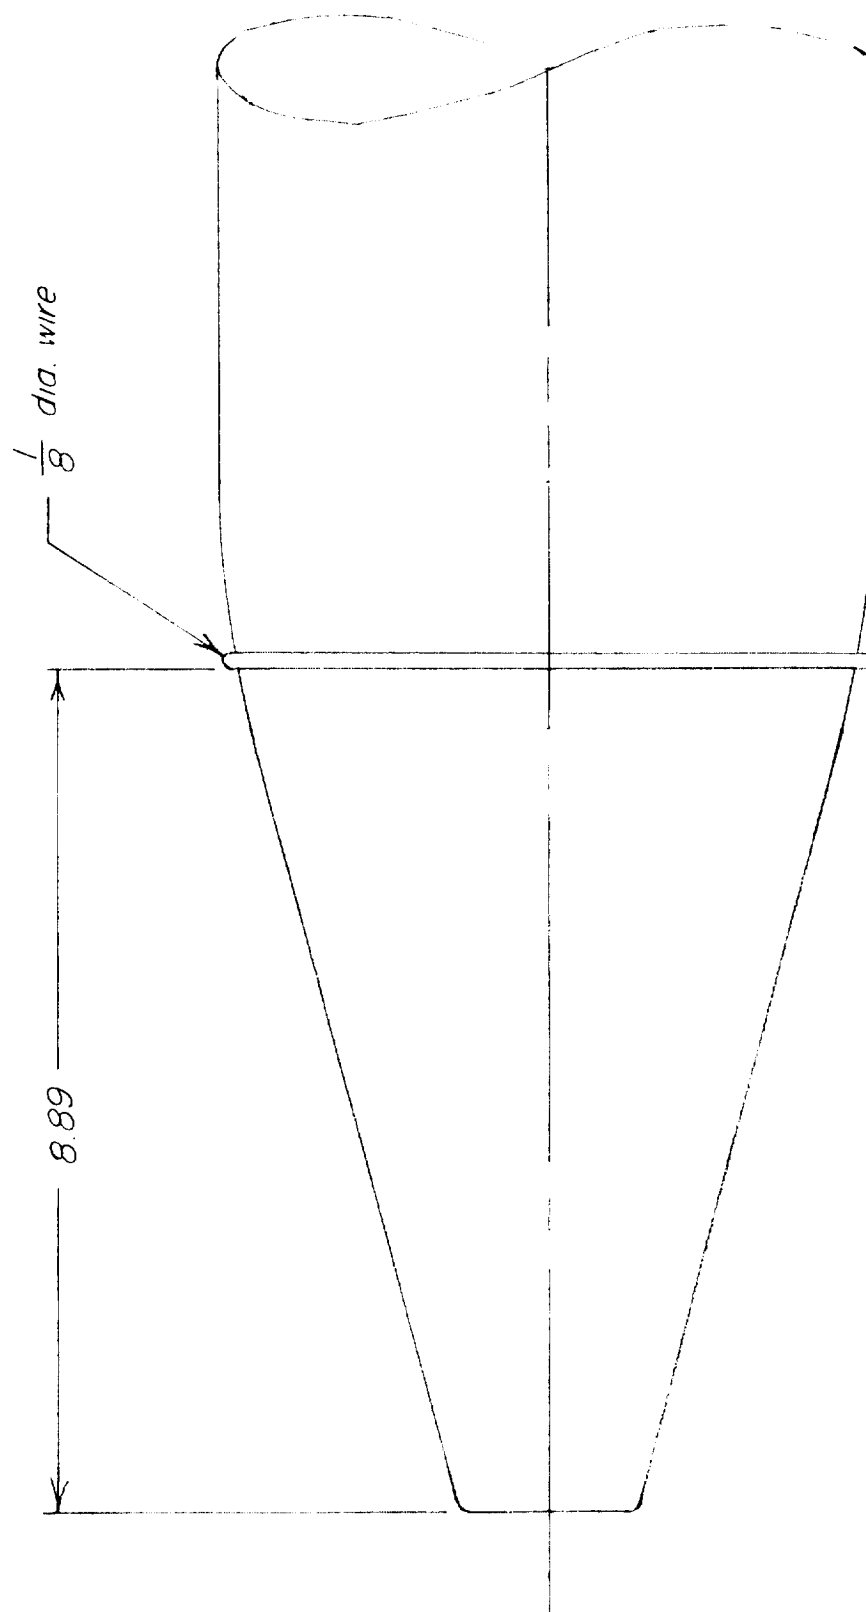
Sketch showing location of ring spoiler. Dimensions are in inches.
